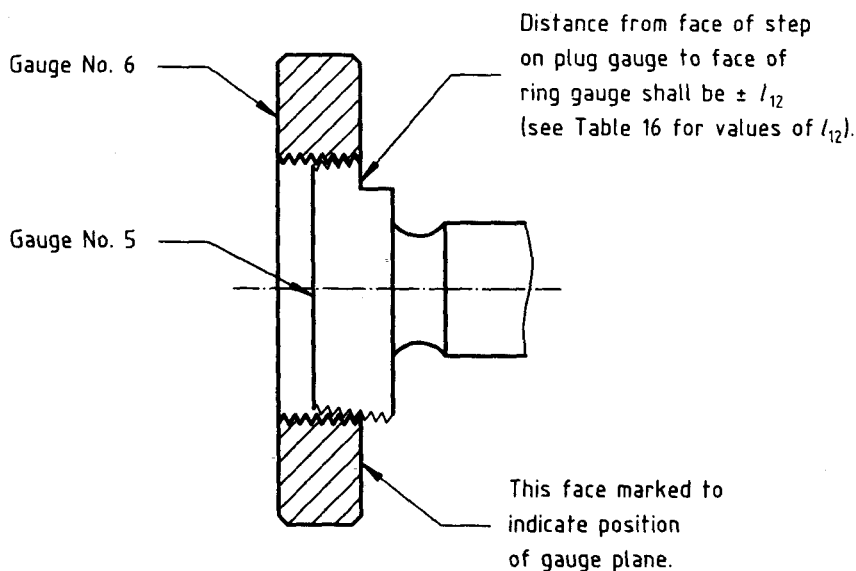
Checking of pitch diameter of new parallel modified thread form ring gauges using taper modified thread form check plug gauge
